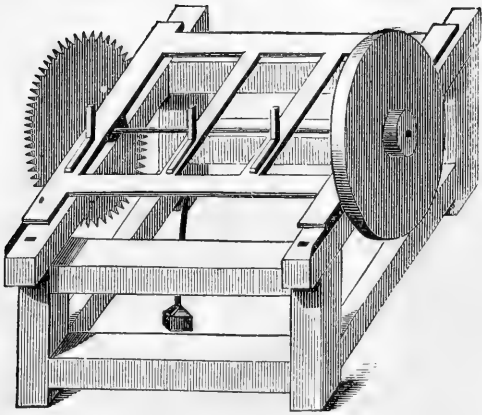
WOOD-SAWING MACHINE FOR CUTTING FUEL.
